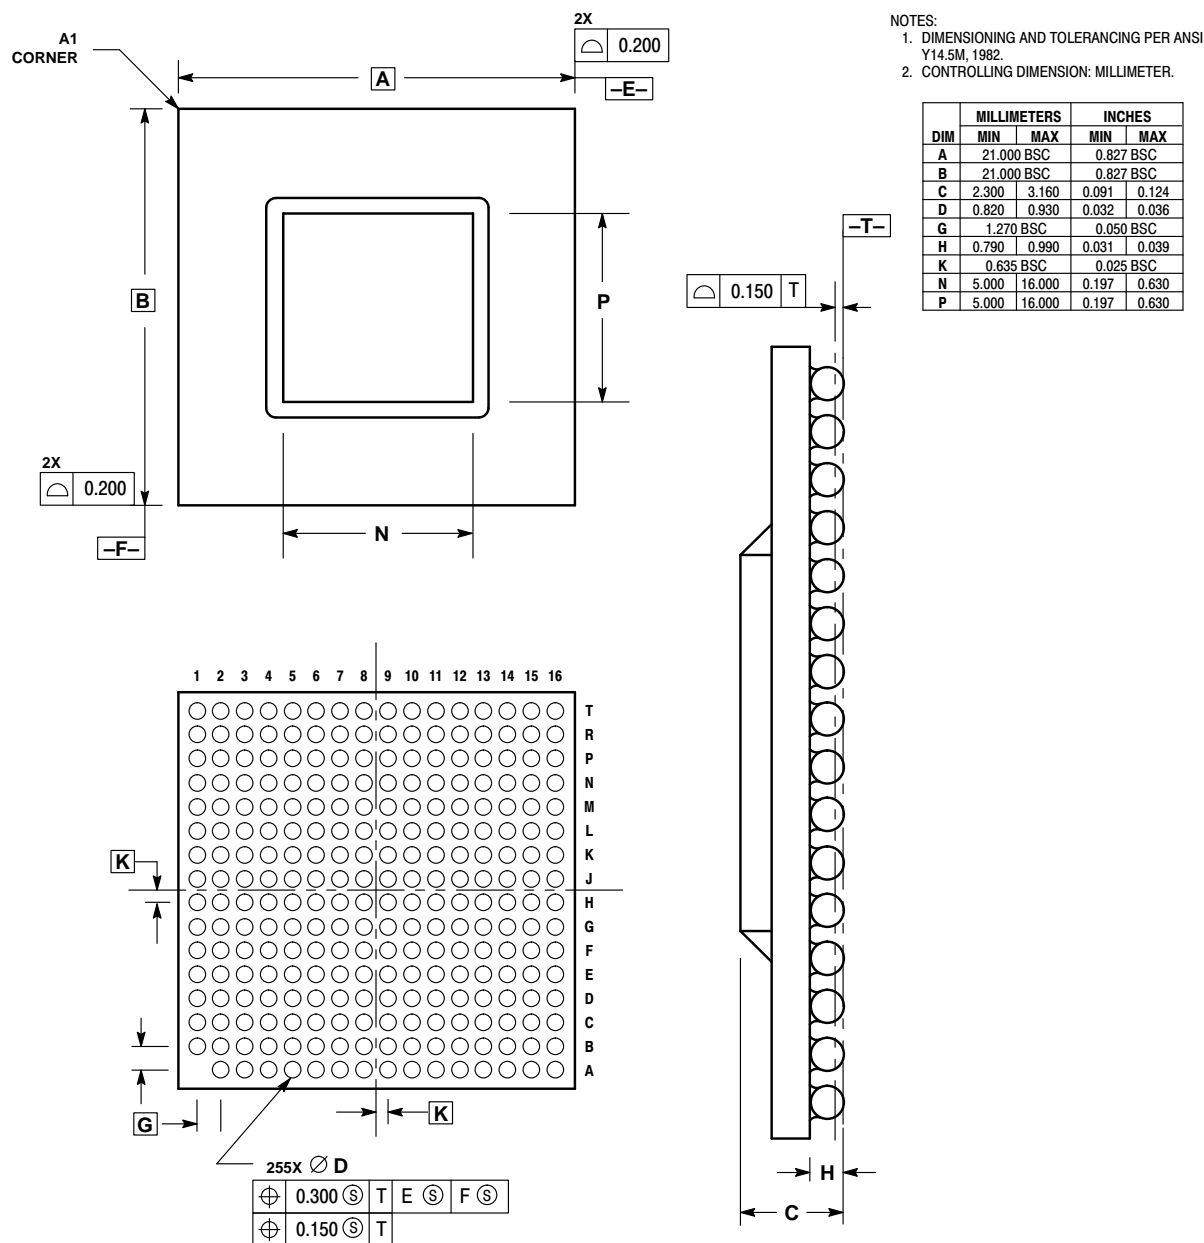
Mechanical Dimensions and Bottom Surface Nomenclature of the BGA Package
